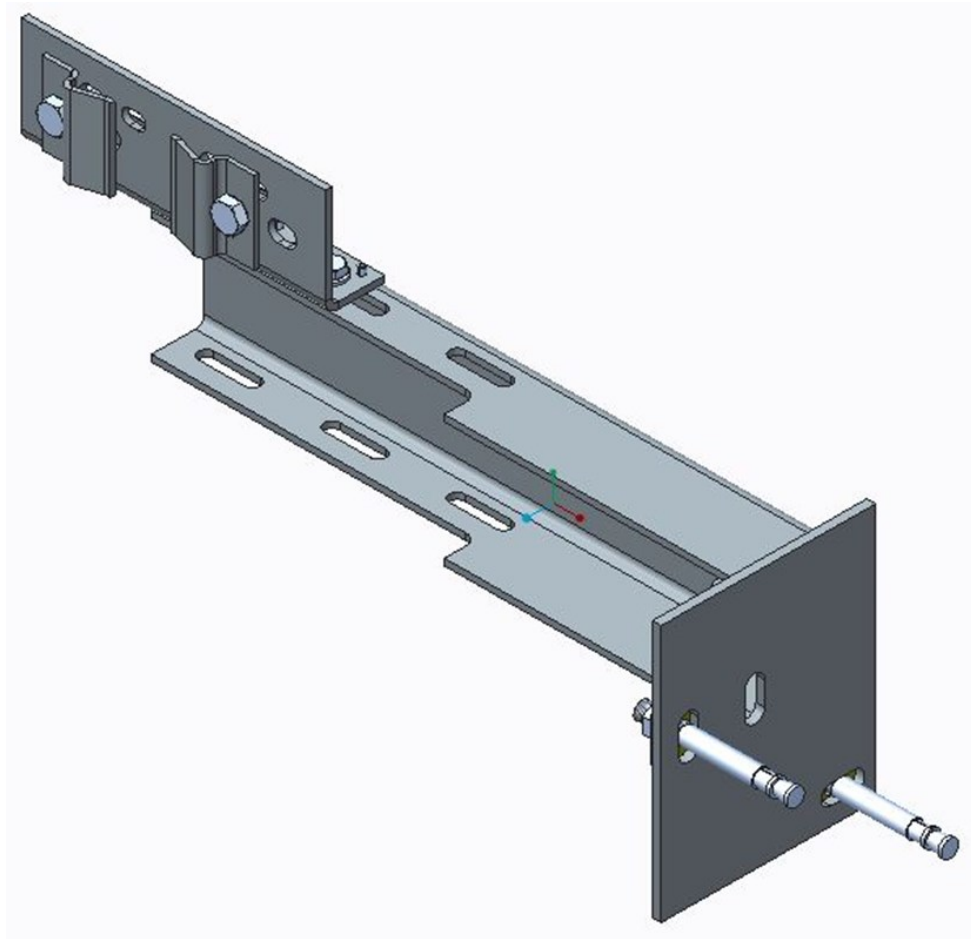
Single counterweight bracket (KONE Design components, KM773950G01)
